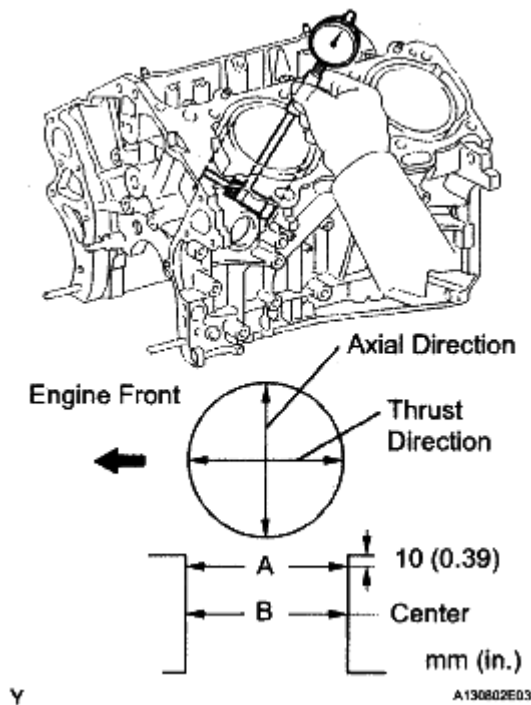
Measuring Cylinder Bore Diameter Using Cylinder Gauge
